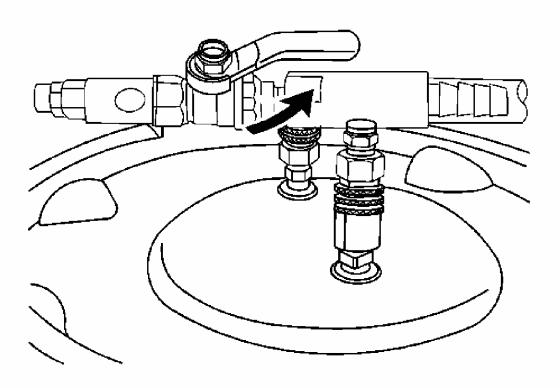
Attaching Extraction Hose To Vacuum Hose Courtesy of GENERAL MOTORS CORP.
